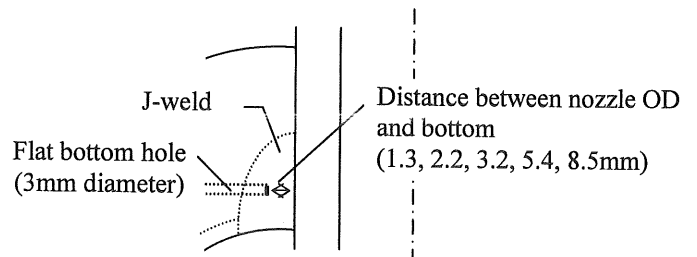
Schematic drawing of specimens with flat bottom hole in J weld
